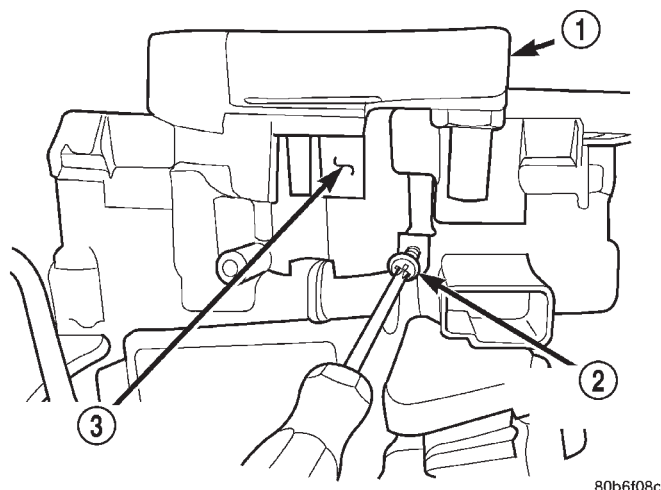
Multi-Function Switch Mounting Housing Screw Remove/Install
